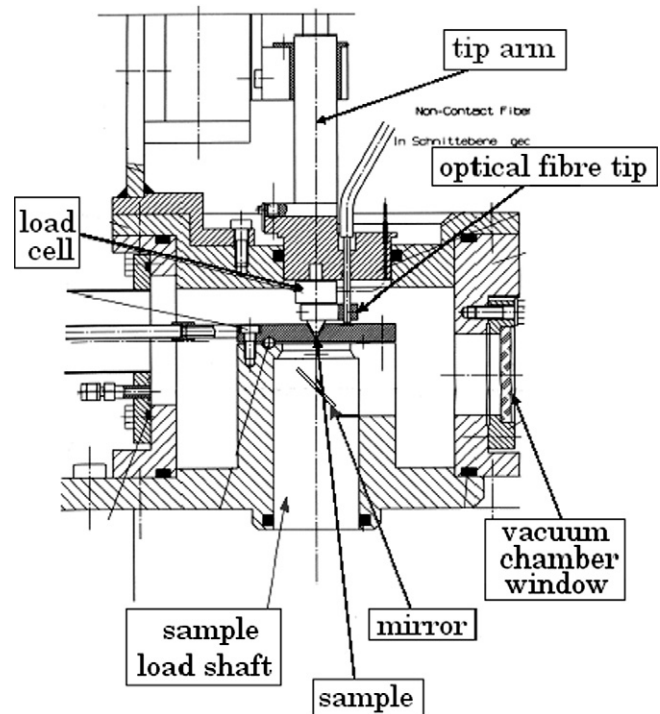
Measurement chamber technical drawing, principal components are shown.
